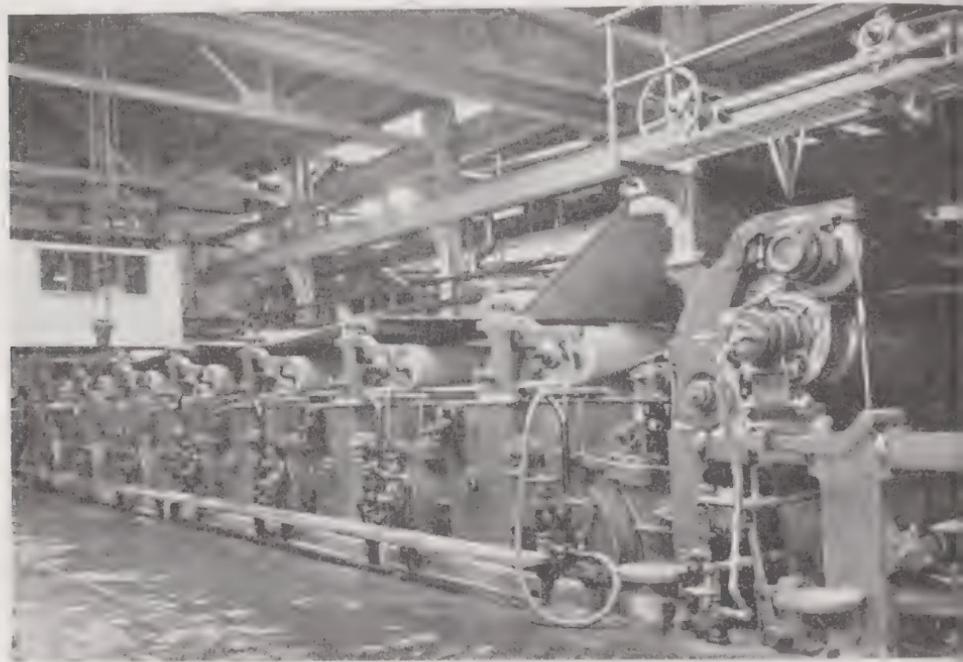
Wet end or forming section of multi-cylinder papermaking machine.
